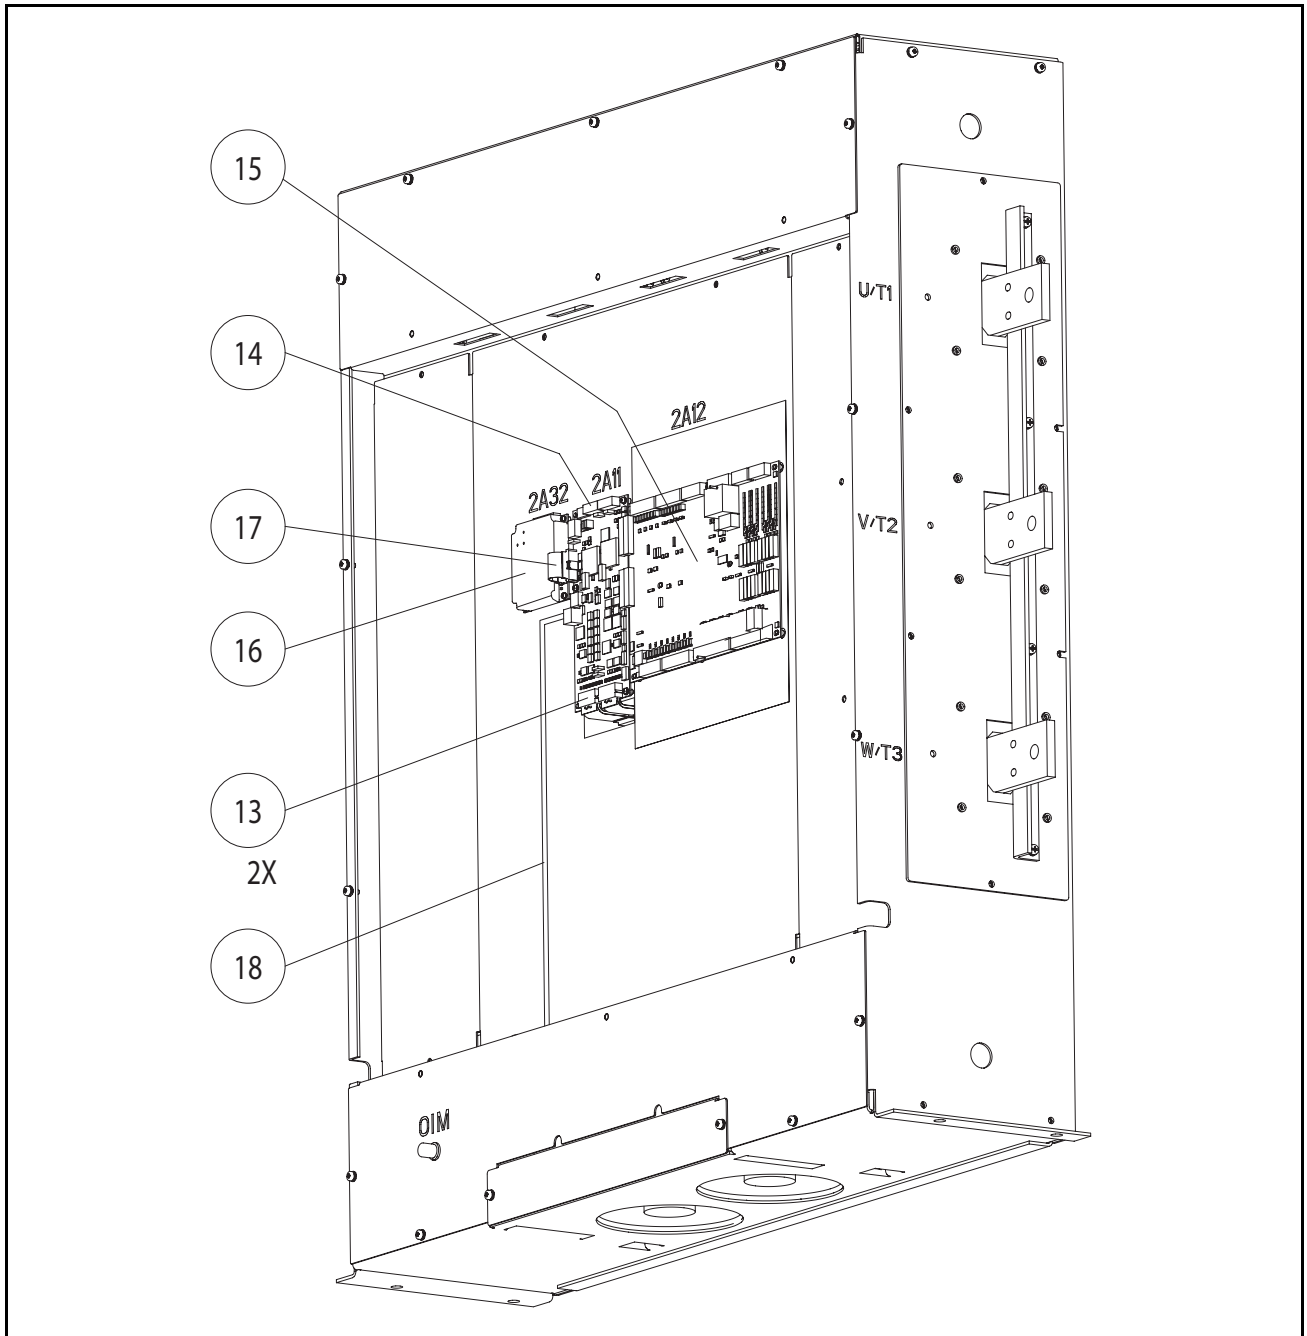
Power Module Component Locations - Front Panel Removed (Frame 4)
